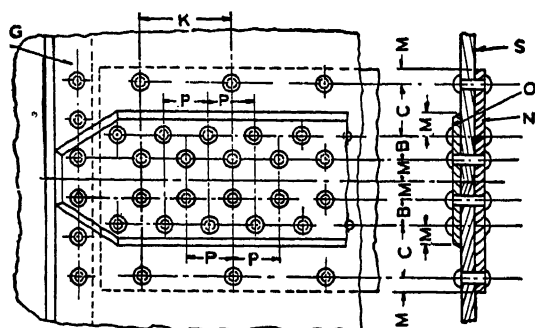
Triple-riveted Butt Joint—Longitudinal.
